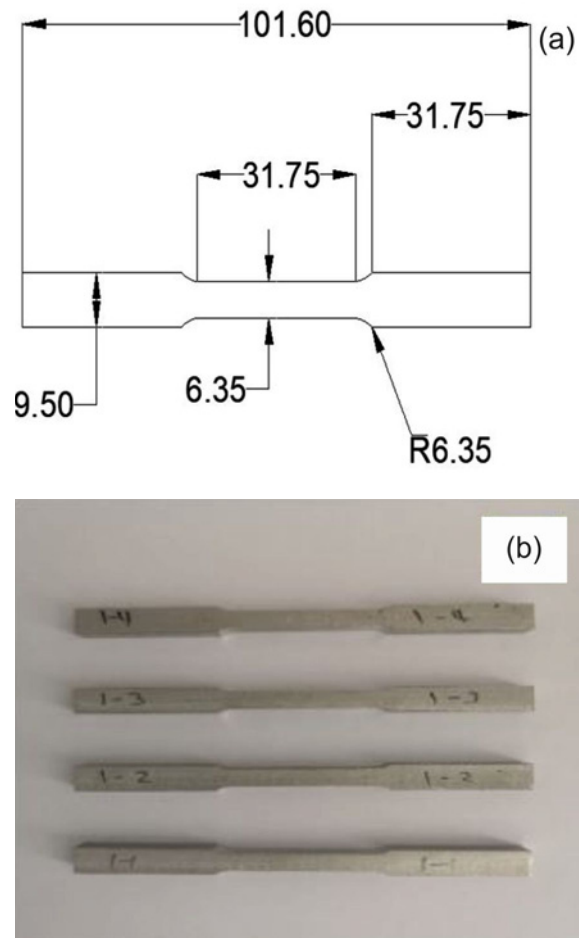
(a) Tensile test specimen dimensions and (b) 4 tensile test specimens cut using wire EDM cutting machine.
